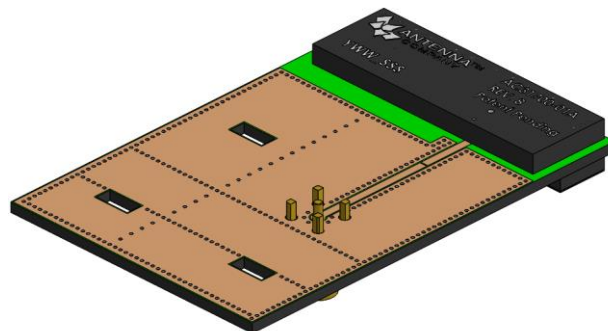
Isometric view of the AC31700-01A main antenna and its booster counterpart AC31700-01B placement on the host PCB
